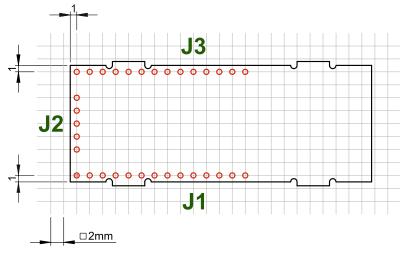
iPOS2401 MX-CAN PCB Footprint
